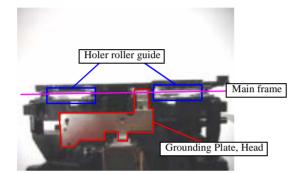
Setting position of Grounding Plate, Head & Holer roller guide
